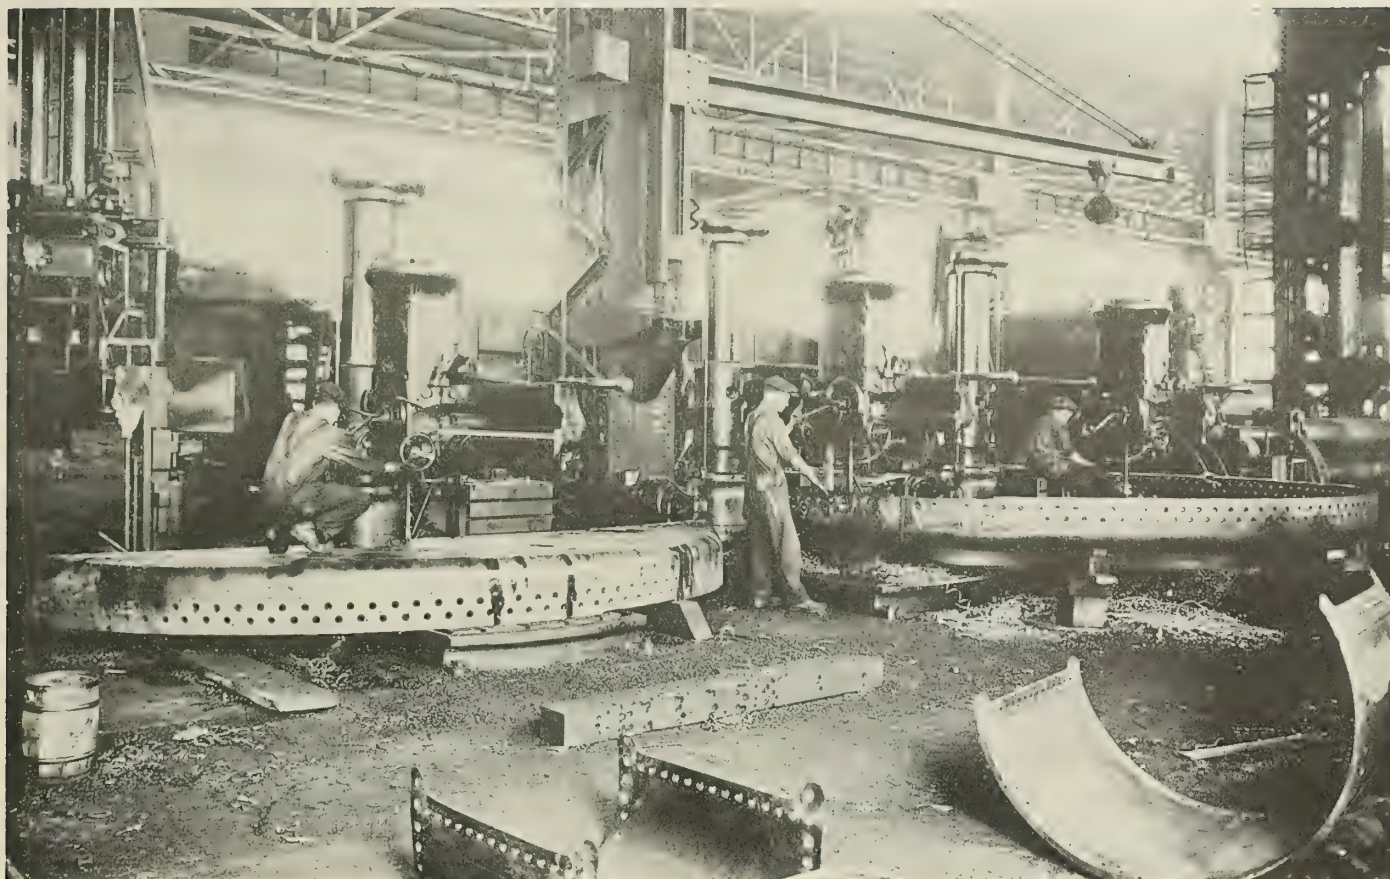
Cutting Tube Holes and Stayholes in Boiler Heads
